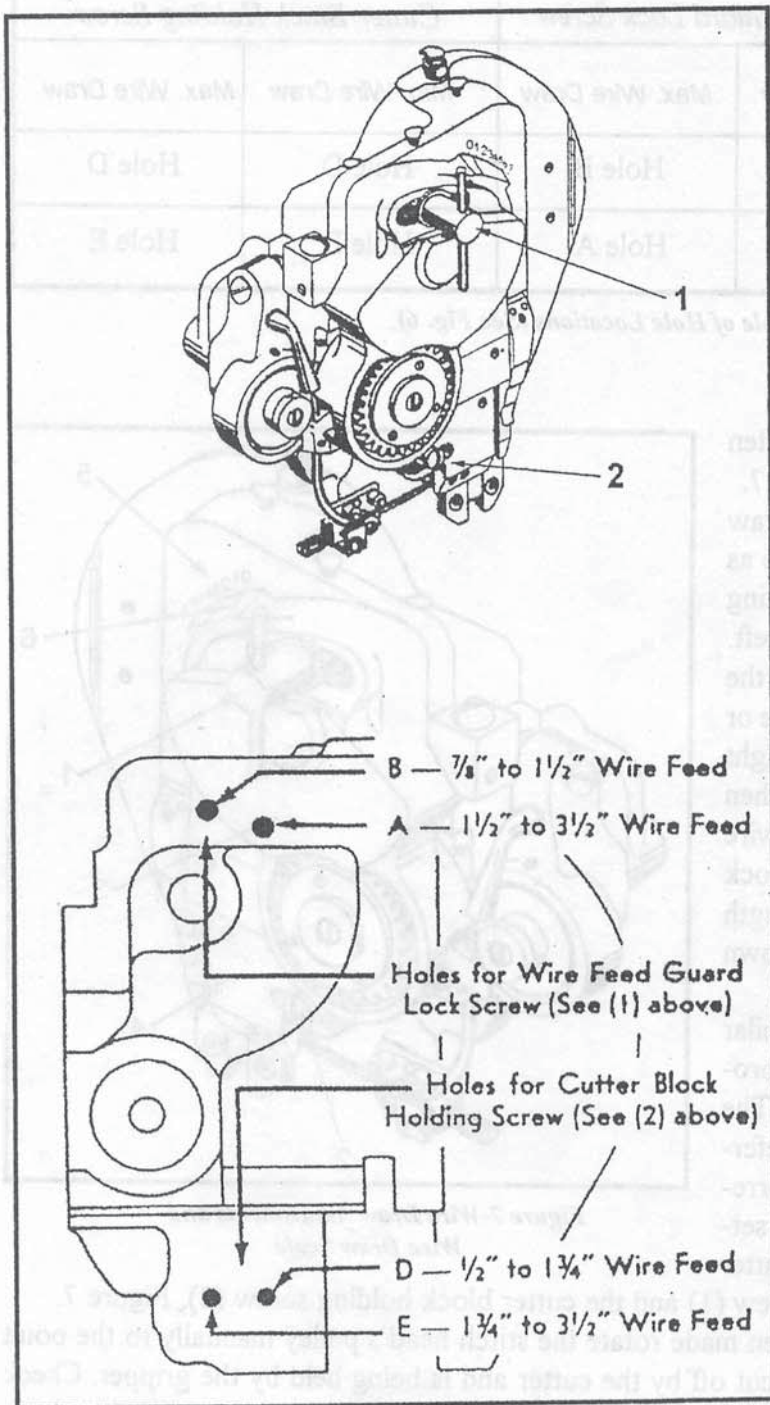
Positioning Wire Feed Lock Screw and Cutter Block Holding Screw
